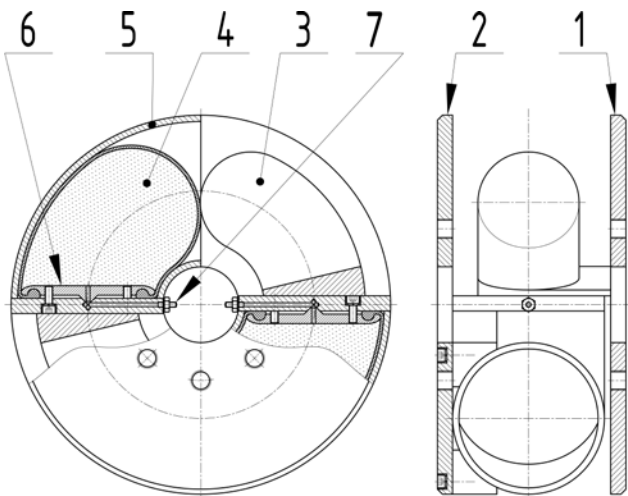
The piston pneumatic flexible shaft coupling type 2-1/110-P-C in unloaded state
